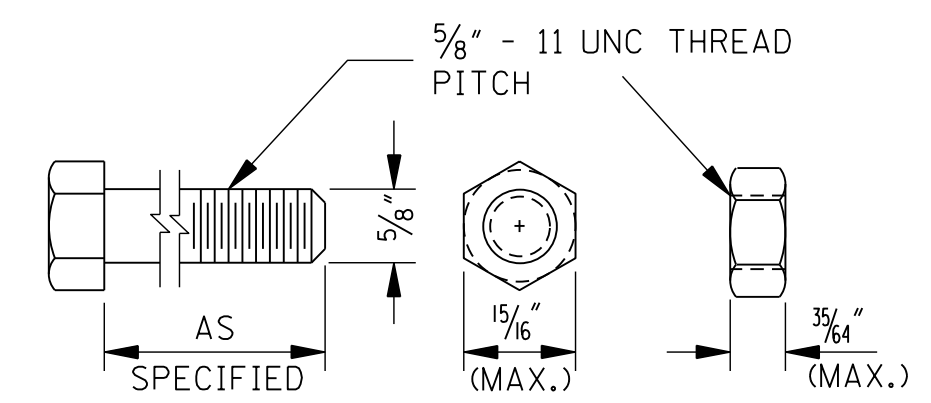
DETAILS OF ADJUSTABLE HEIGHT BLOCKOUT ASSEMBLY
